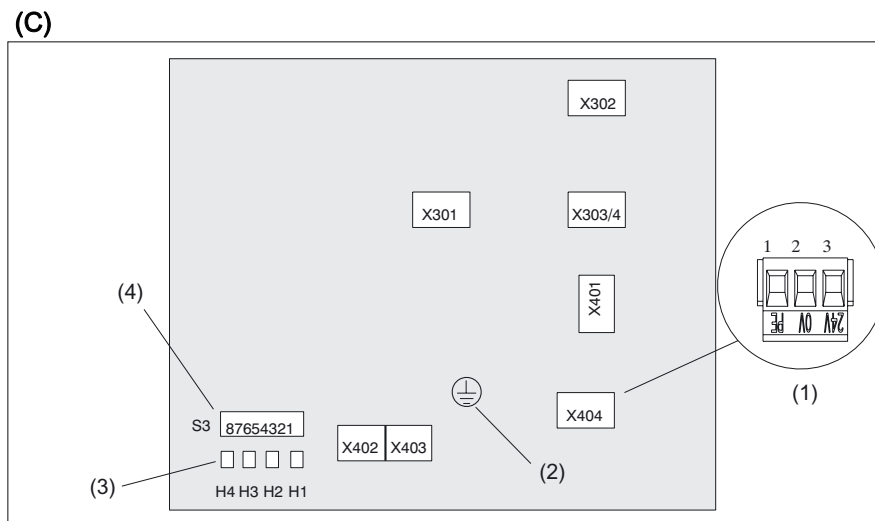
Rear of machine control panel (MCP 416C-M and MCP 416C-T)
